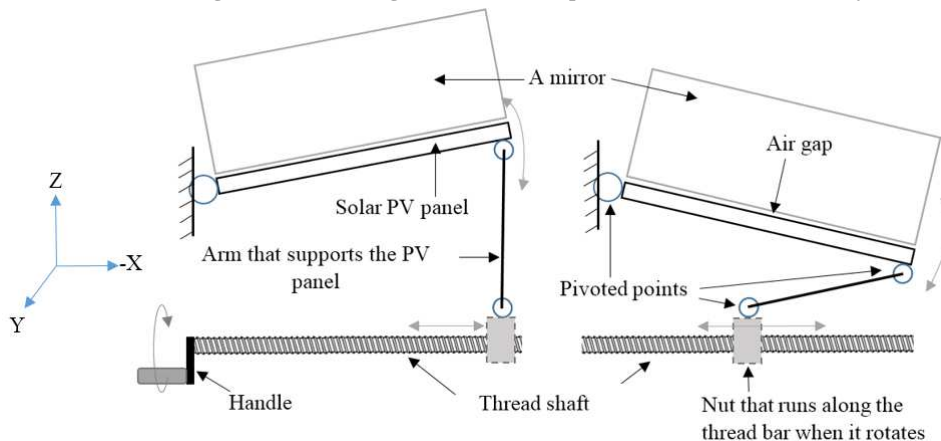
A side view of the solar panel assembly mounted on a threaded shaft
